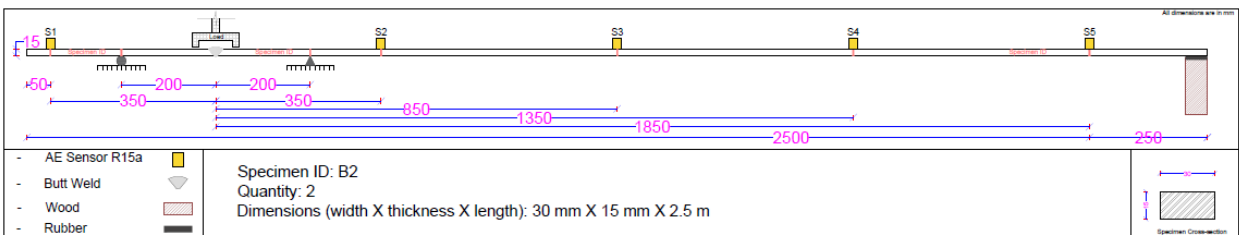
Specimen B2 Marking and sensors location from the centre of the weld
